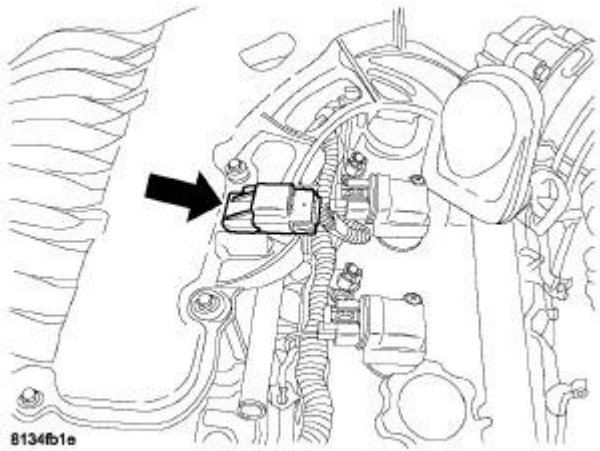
Locating Manifold Air Pressure (MAP) Sensor
